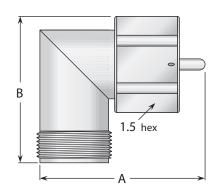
(Right angle plug–jack; connects one plug and one jack)
